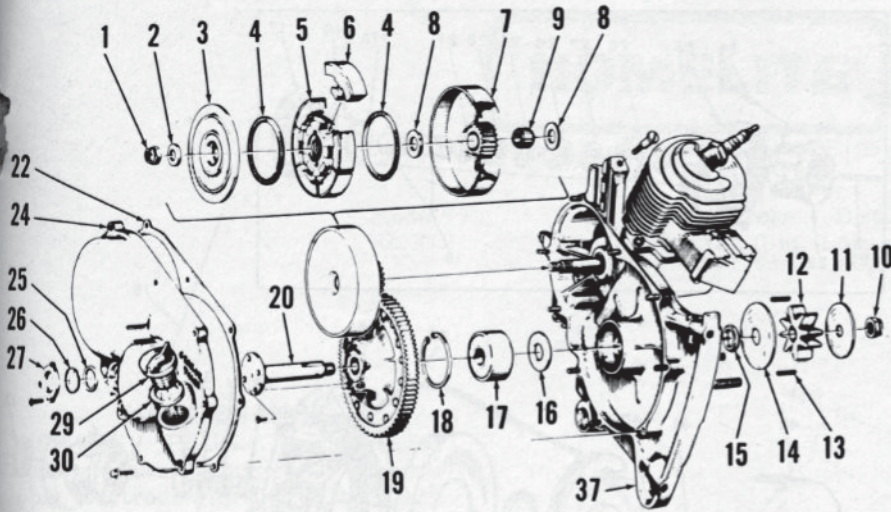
Exploded view of two-gear transmission for WIZ and model Super 77. One standard and two optional gear ratios are available. Standard gear ratio of 3.57:1 is provided by output gear with 75 teeth and clutch drum gear with 21 teeth. Optional 2.84:1 ratio requires output (driven) gear with 71 teeth and clutch drum gear with 25 teeth. On 2:1 optional gear ratio, output gear has 64 teeth and clutch drum gear has 32 teeth.
